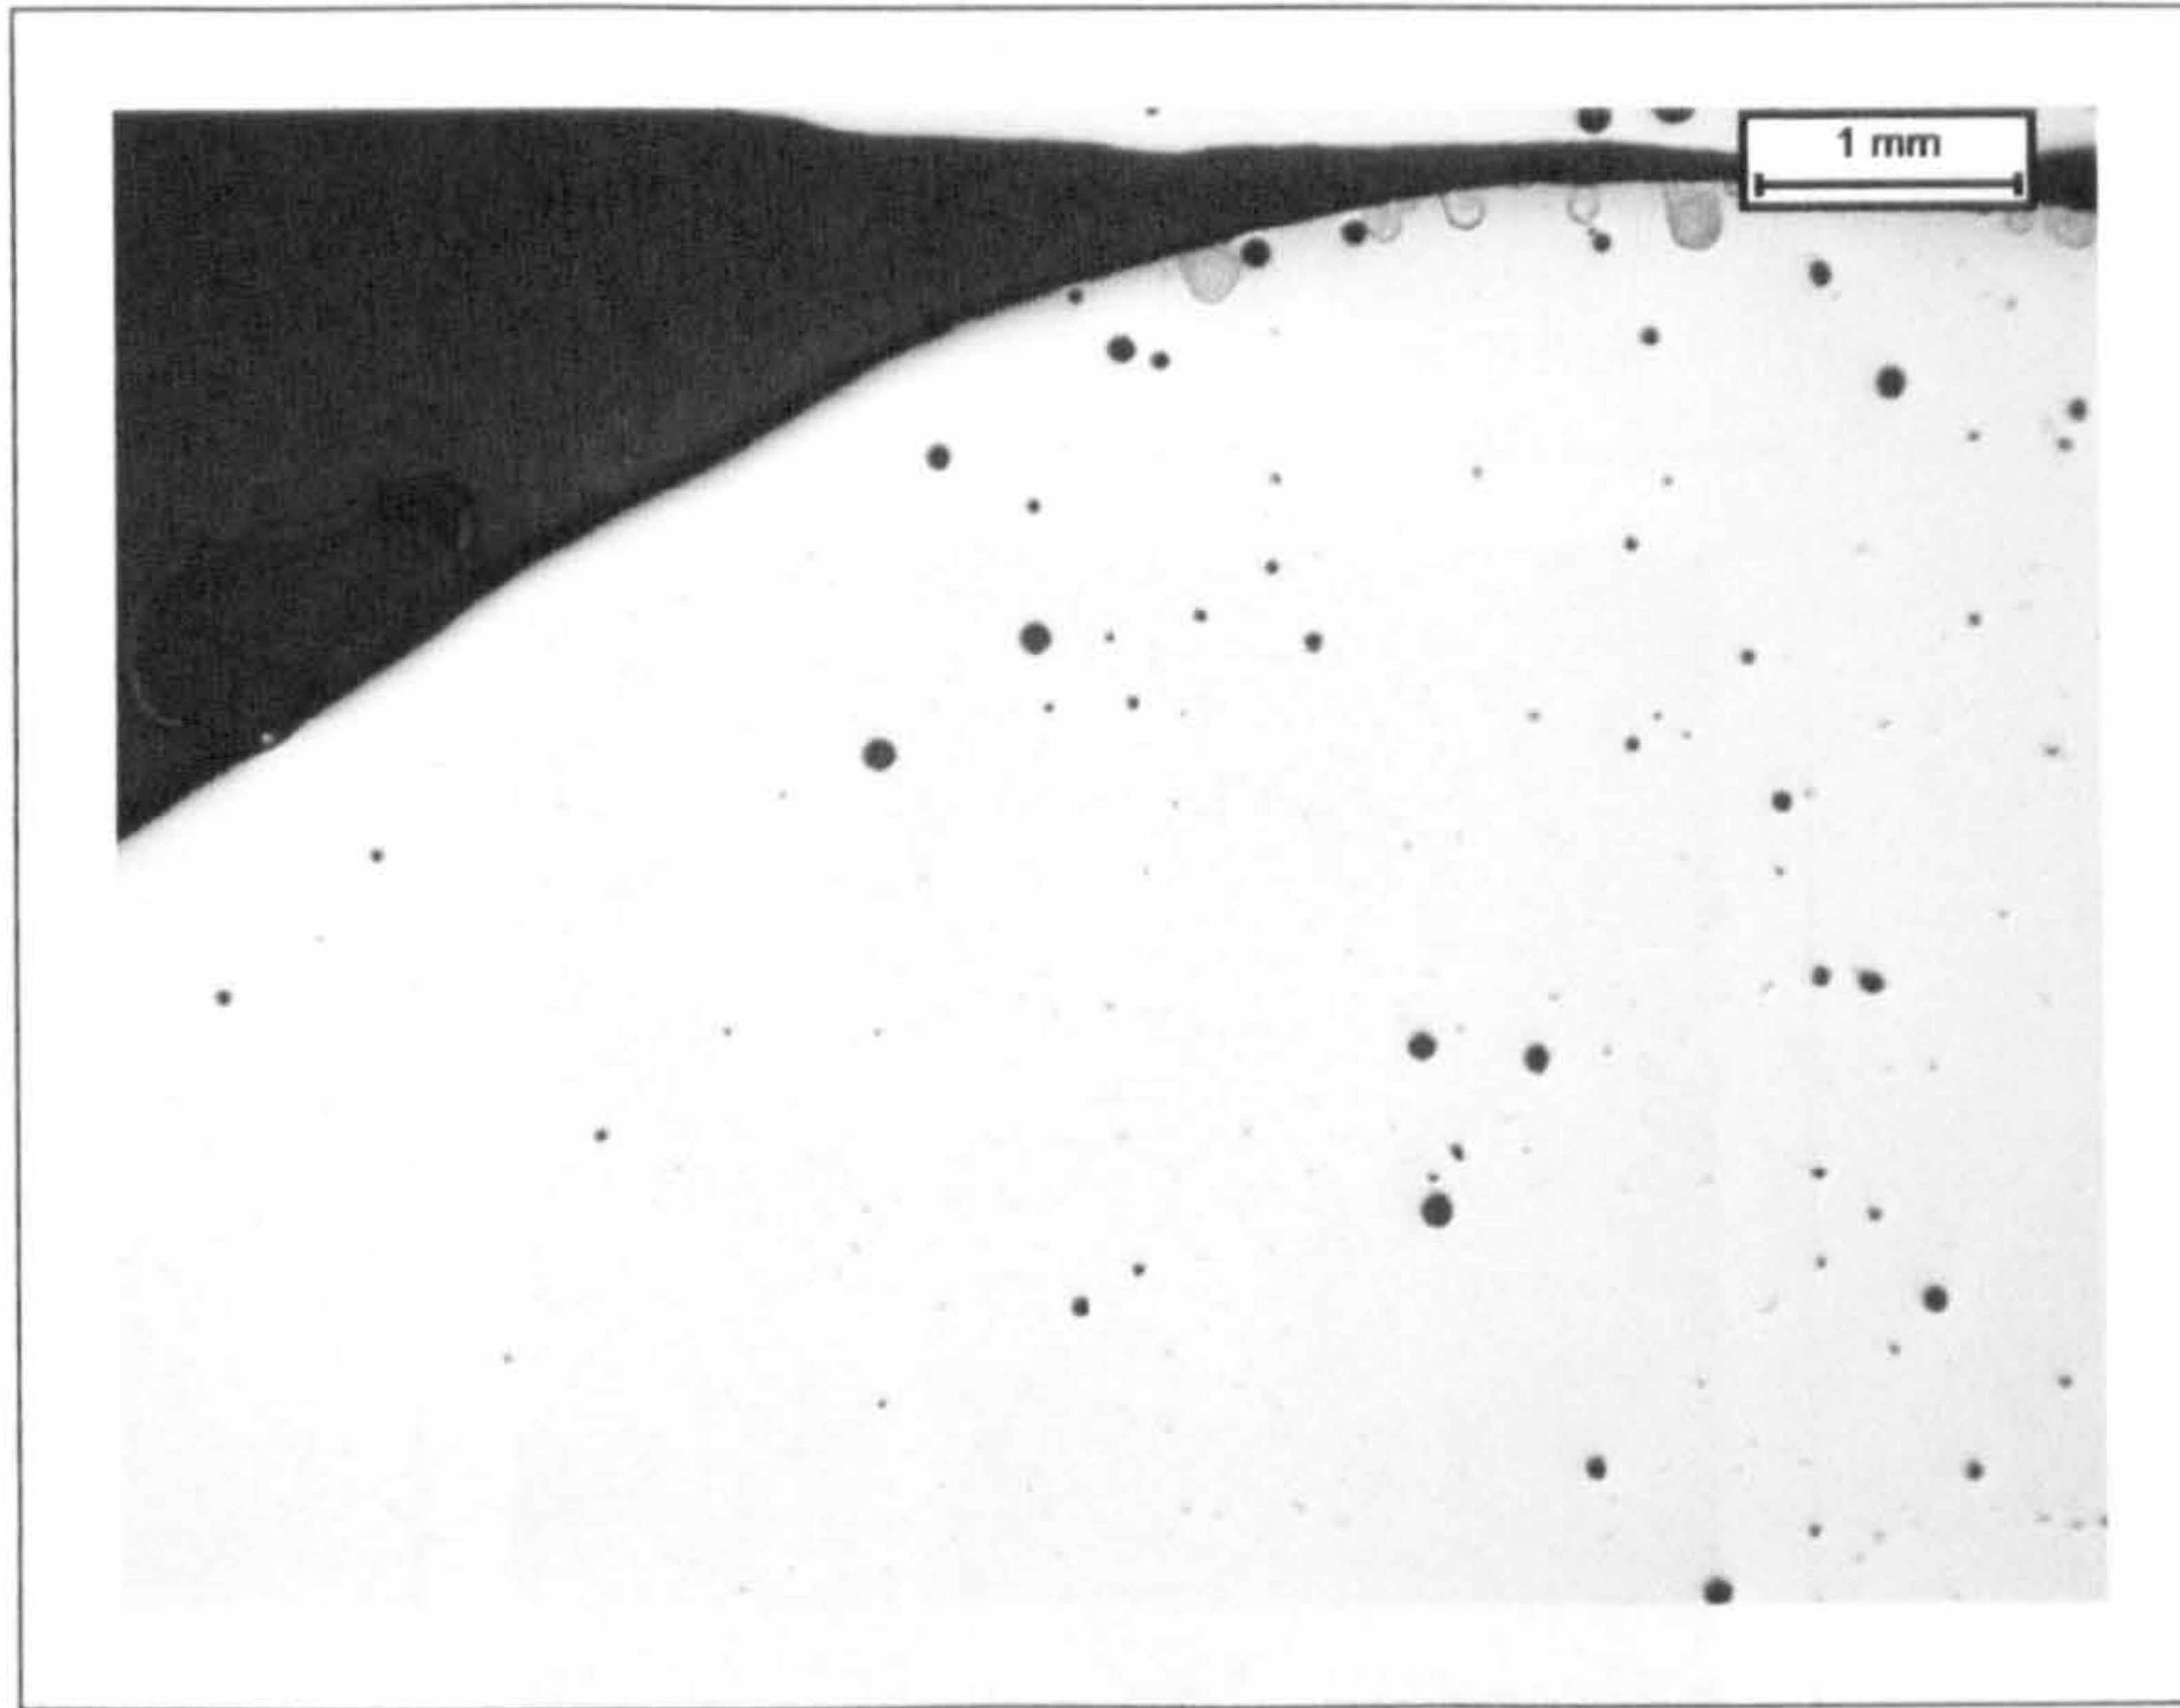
Optical microscopy image of porosity in MIG HI weld bead.
